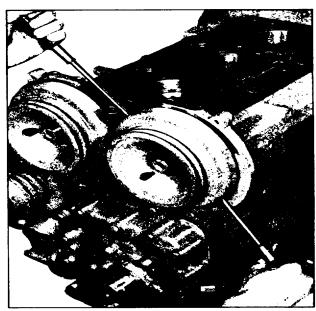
Removing Front Balance Weight (Pulley Type)
